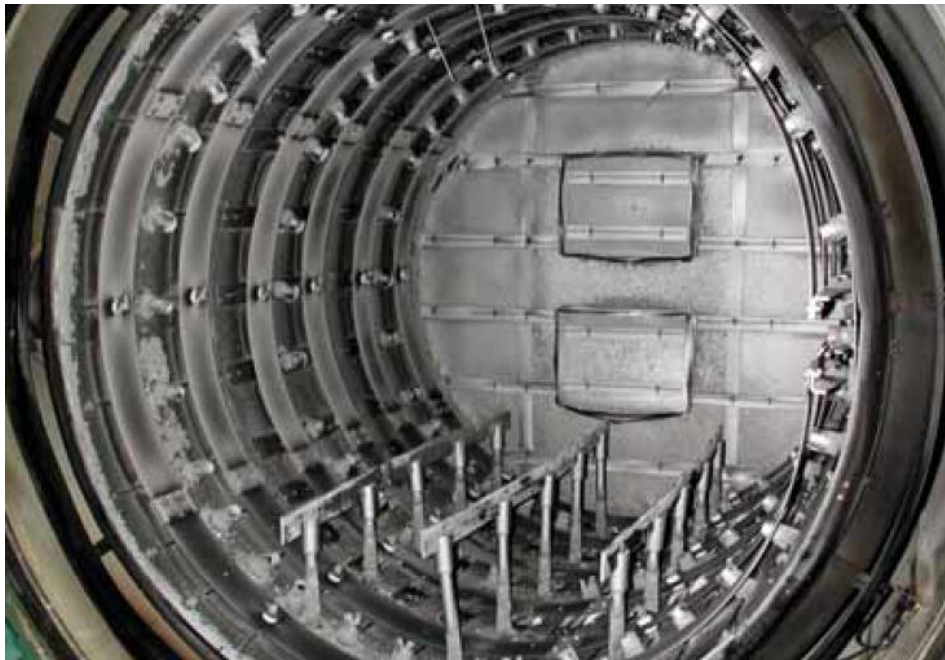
HEAT SHIELDS WITH BRAZING DEPOSITS [5]
